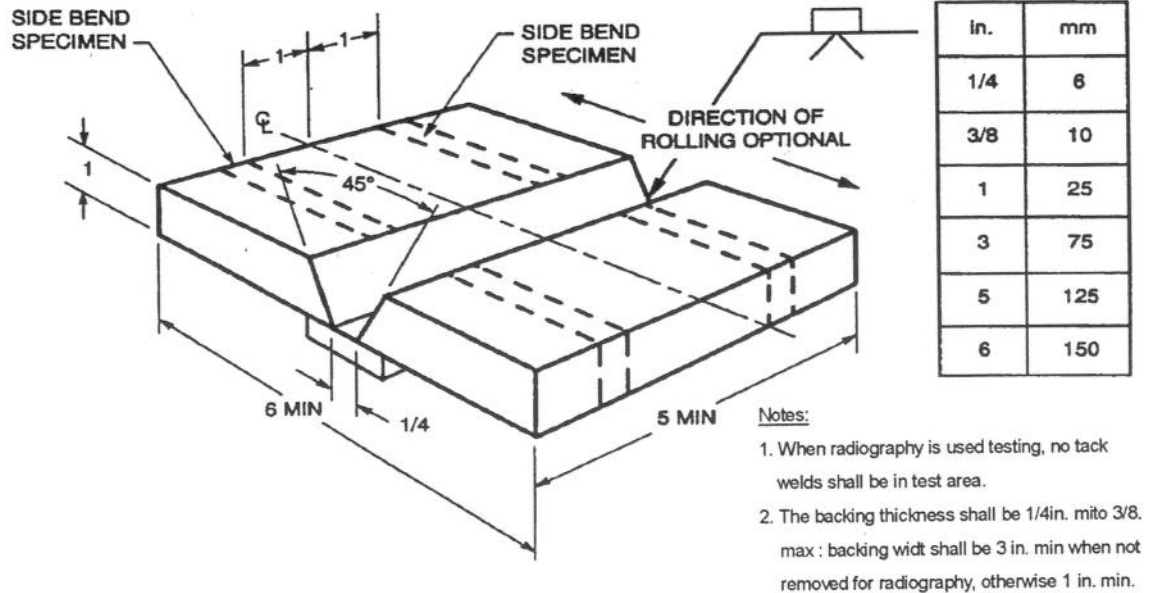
Test Plate for Unlimited Thickness - Welder Qualification (see 4.23.1)
